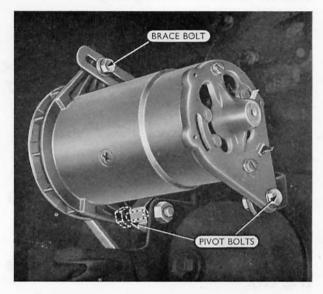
Generator mounting. The pivot bolts and brace bolts must be slackened when adjusting the fan belt tension
